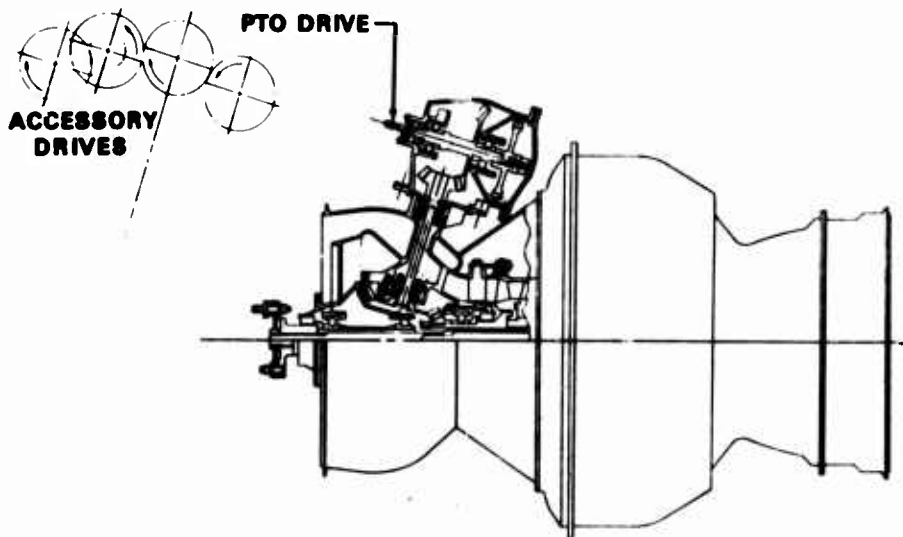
Candidate C&A Drive (Tower Shaft Drive)
